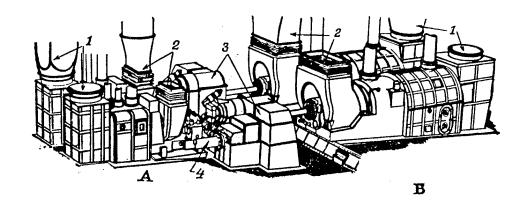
Combined gas-gas turbine power plant (A- two Tyne RM1A cruising-speed gas turbines; B- two Olympus TM3B full-speed gas turbines): 1- air intakes; 2- gas-exhaust pipes; 3- reduction gears; 4- propeller shaft.
